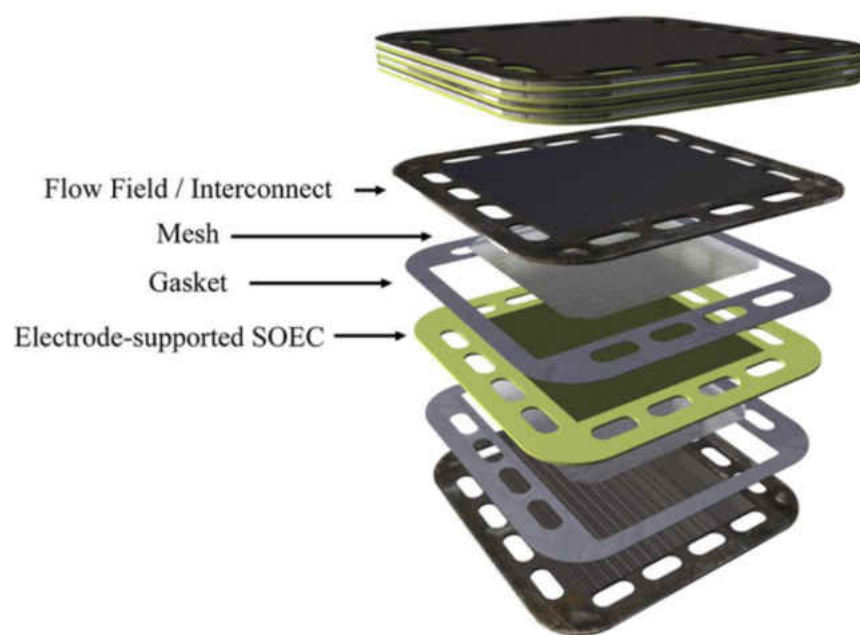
Exploded view of a 5-cell stack from MSRI [93].
